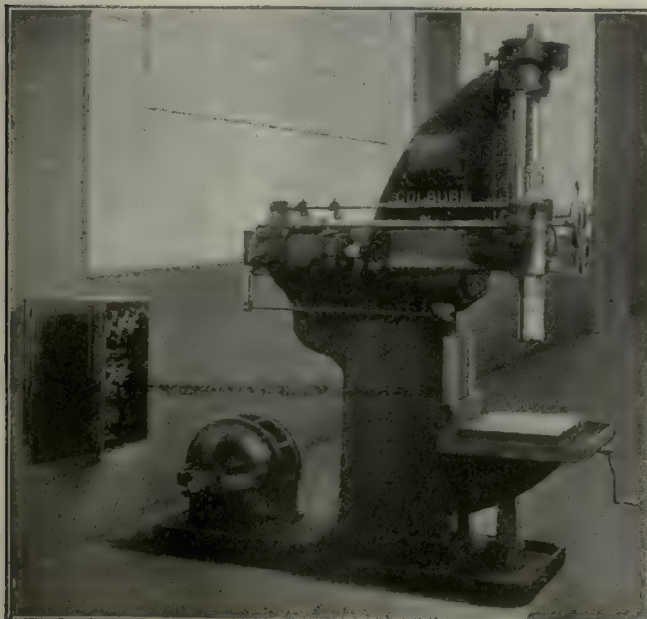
DRILLING MACHINE WITH ALTERNATING-CURRENT EQUIPMENT
